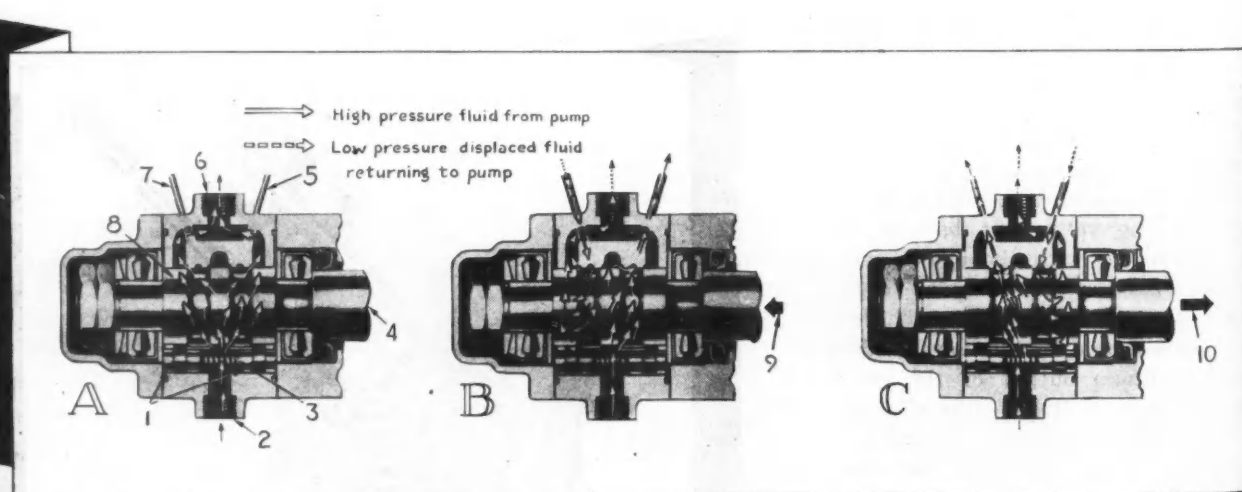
Control valve used with Ross-Bendix and Saginaw-Bendix hydraulic gears
